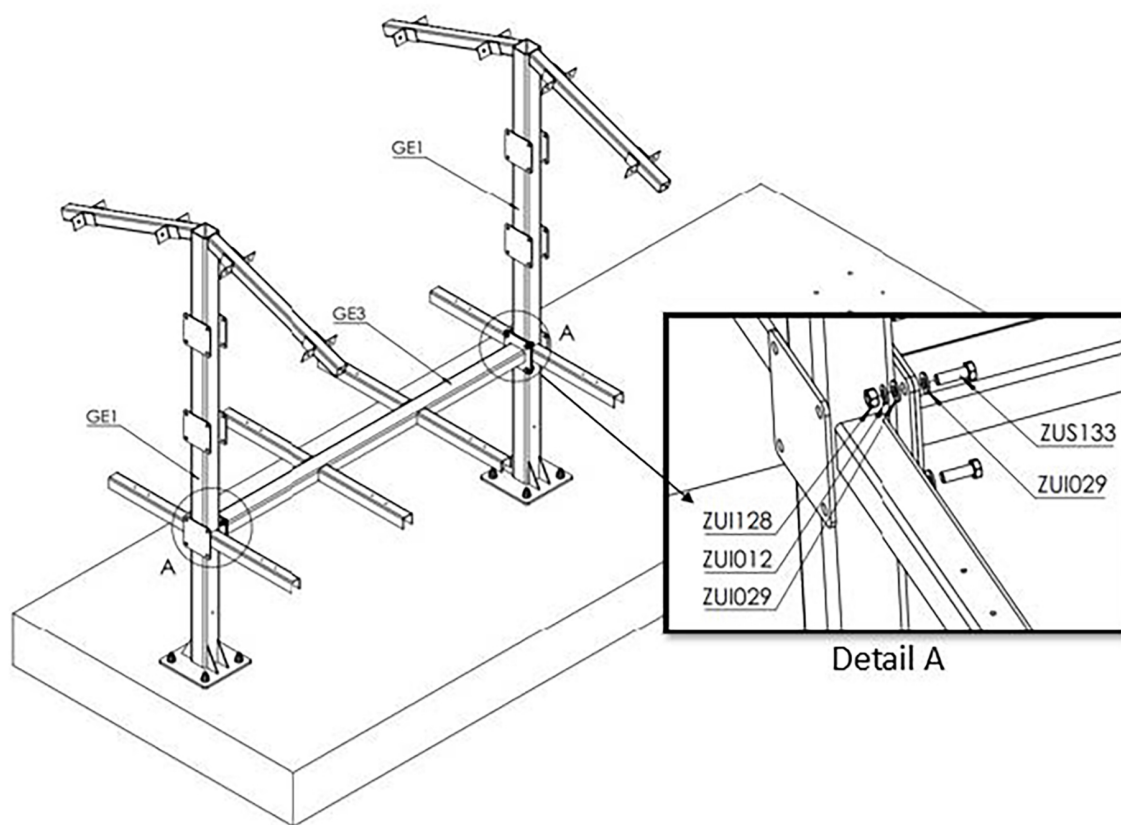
Assembly — Inverter rack — GE3, GE1 Detailed view
